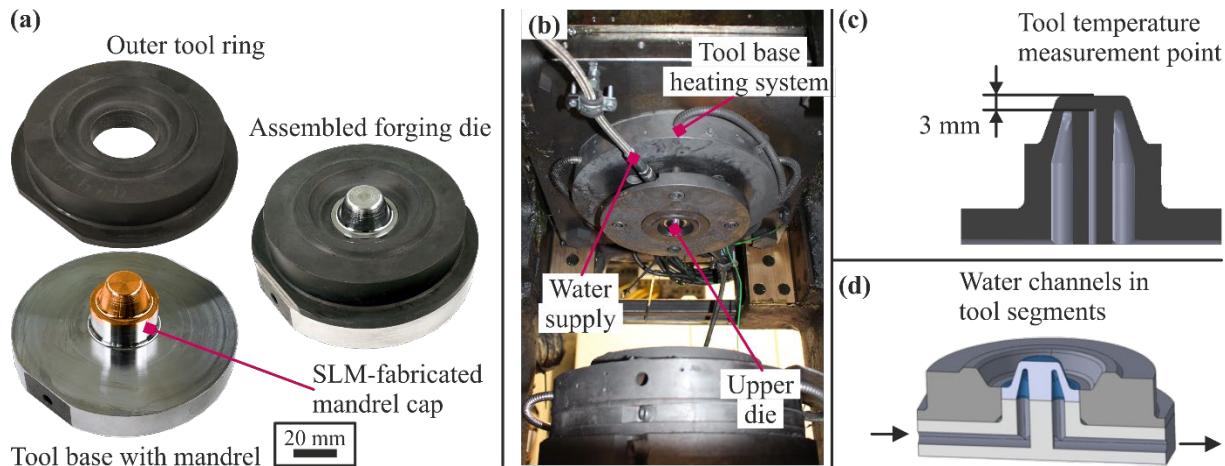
Forging test setup: (a) Hybrid tool concept, (b) Installation in forging press, (c) Temperature measurement location, (d) Water flow through hybrid tool
